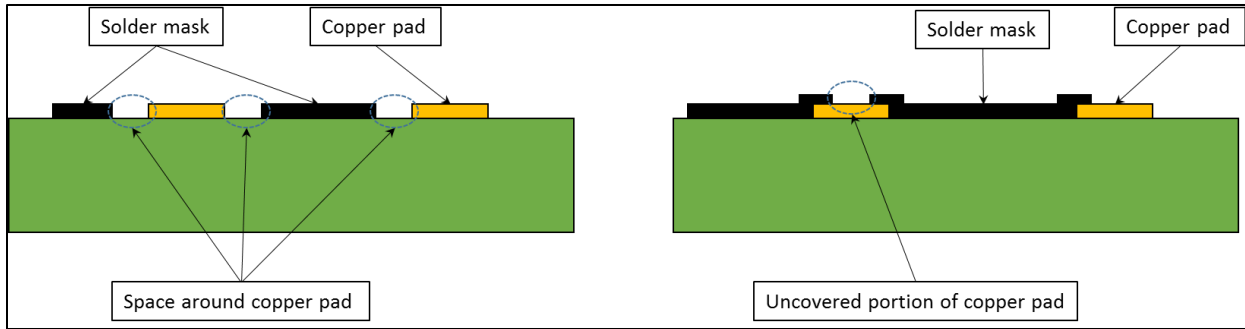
Schematic of Solder Mask Design: NSMD (Left) and SMD (Right)
